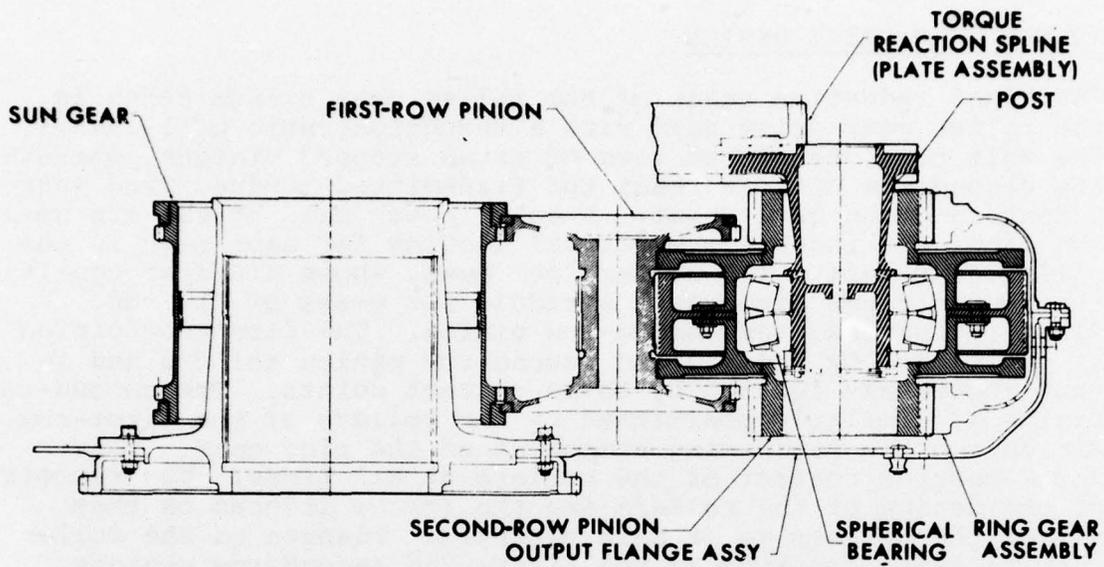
Roller Gear Drive: Final Reduction Stage - Roller Gear Transmission.
